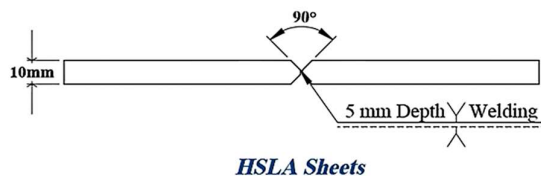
Schematic of samples preparation for butt-weld welding.
